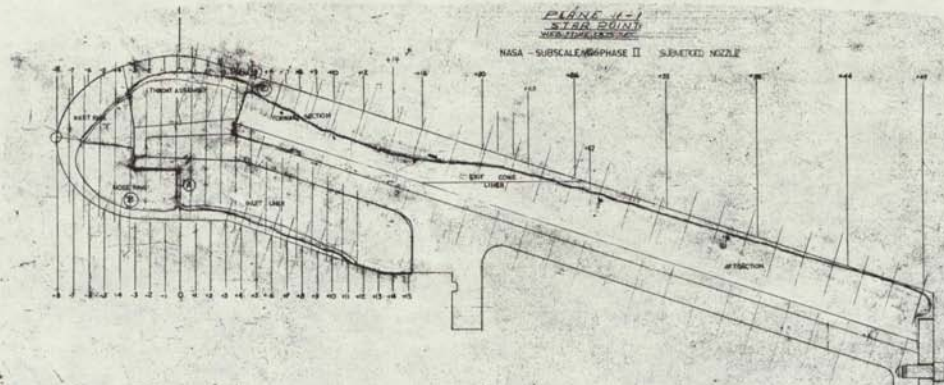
Sectioned Nozzle No. 6 Submerged and Exit Cone Liners
